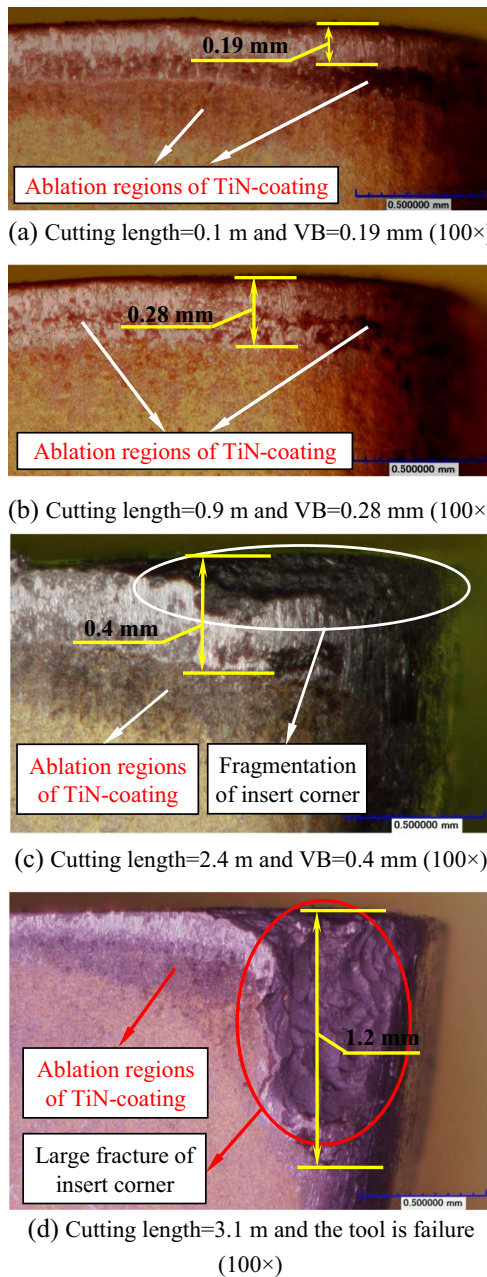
Failure process of the insert for plunge milling ($v_c=30$ m/min, $a_e=4$ mm, and $f=0.1$ mm/tooth)
